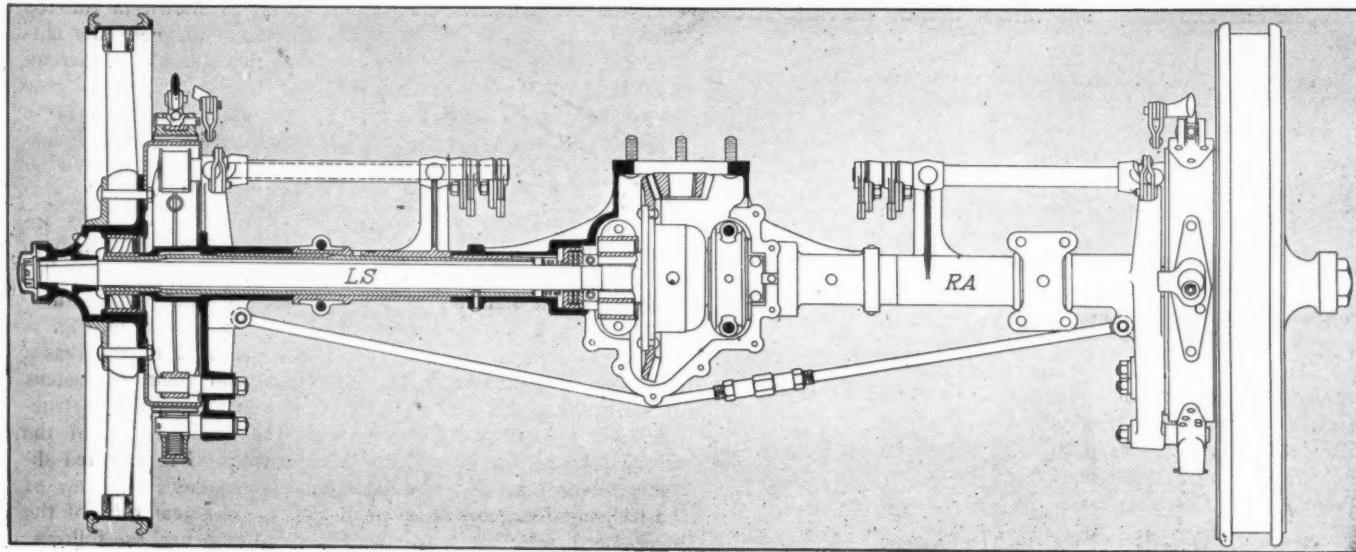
Three-quarter type of floating rear axle used on 1913 Overland line
